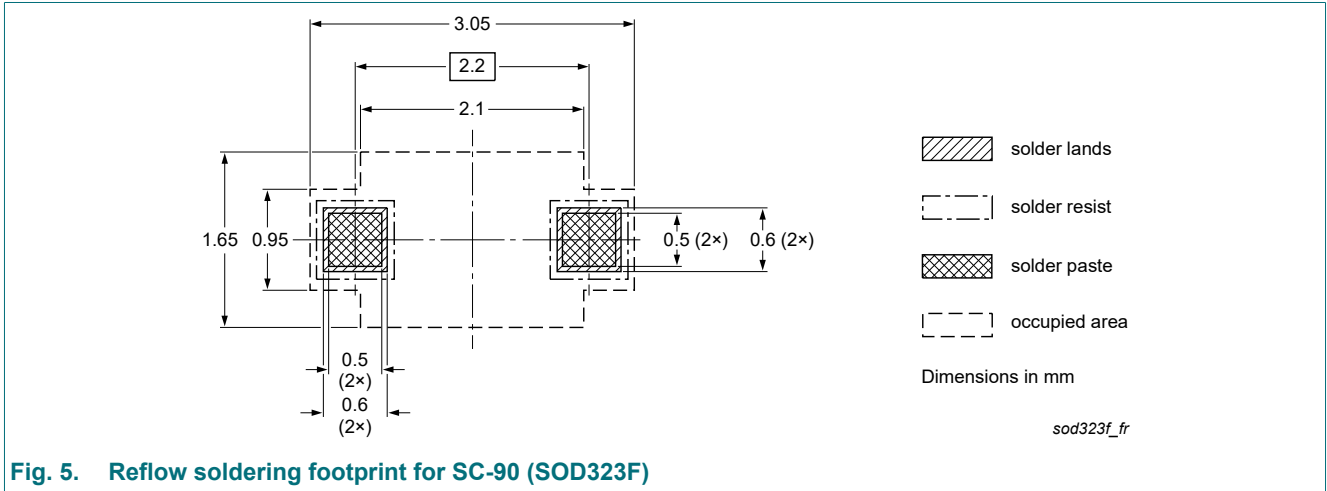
Reflow soldering footprint for SC-90 (SOD323F)
